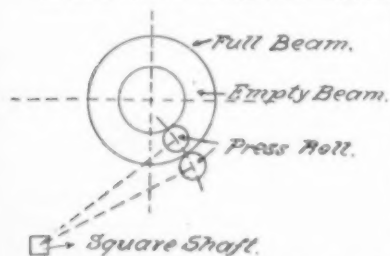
IMPROVED TRAVERSE PRESS-ROLL ATTACHMENT.
